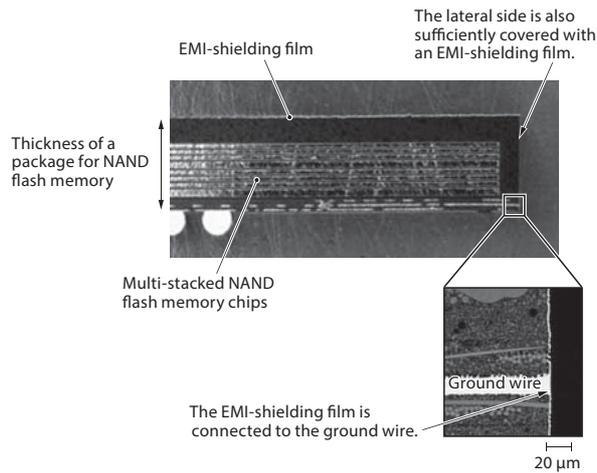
Cross-sectional structure of EMI-shielded package produced by sputter deposition process.
